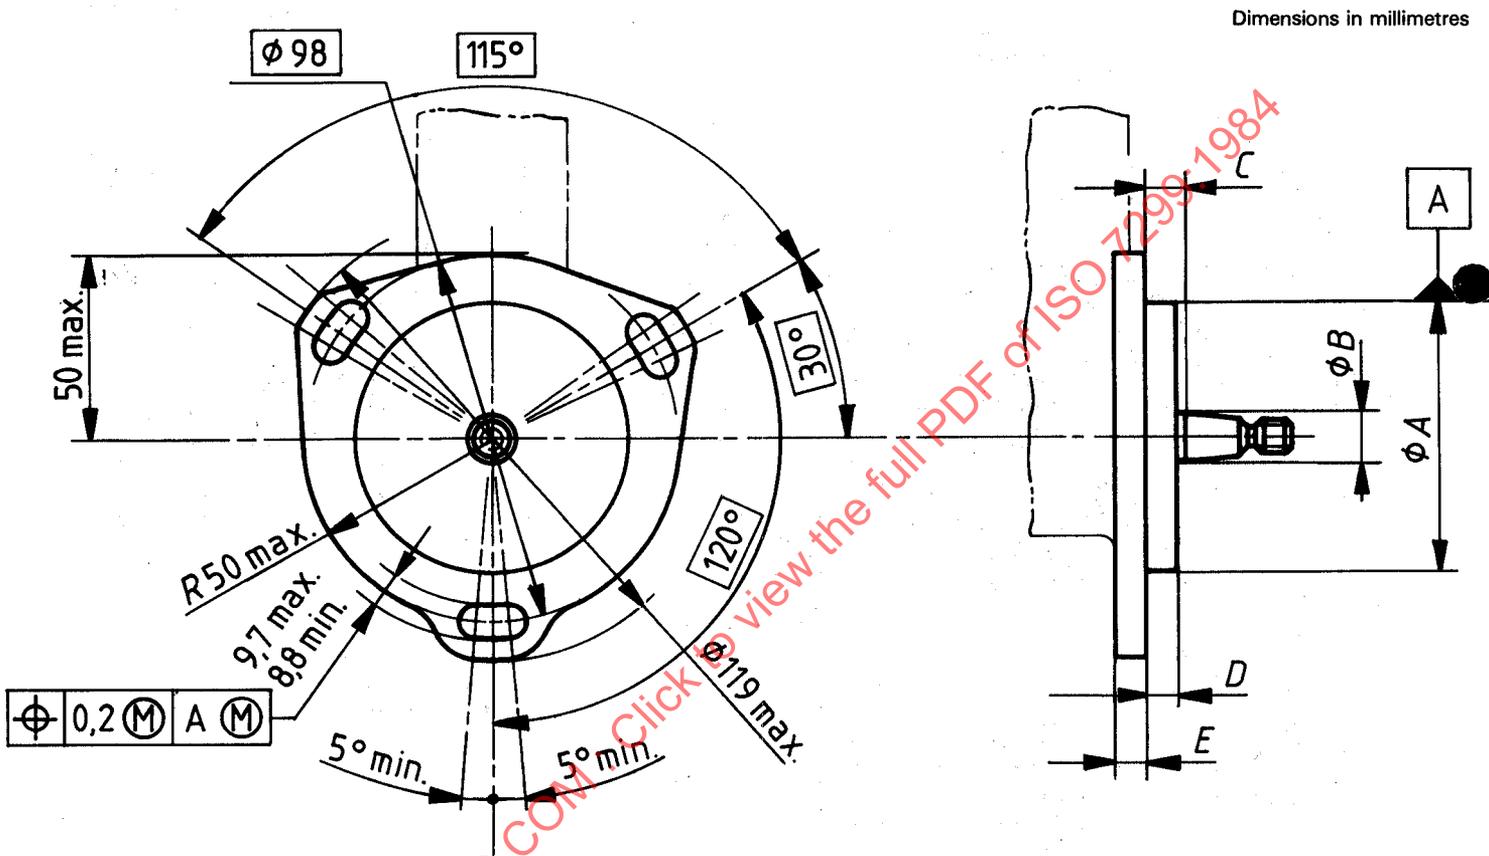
In-line fuel injection pumps — Type 5 end-mounting flange
